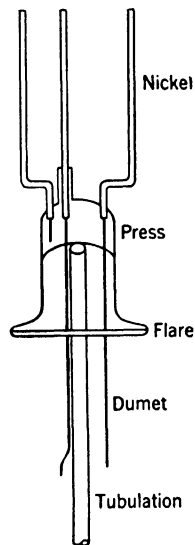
Machine-Made Press with Three Presswelds, Tubulation, and Insulating Glass Sleeve.
